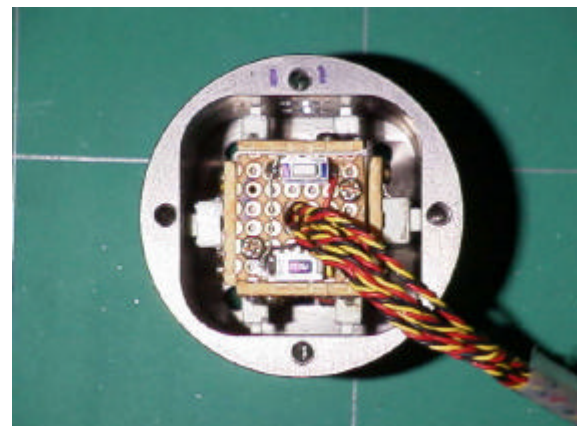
Sensor block is shown with one end of the block and the sensor handle removed. The switch cube is inside the cavity of the block.
